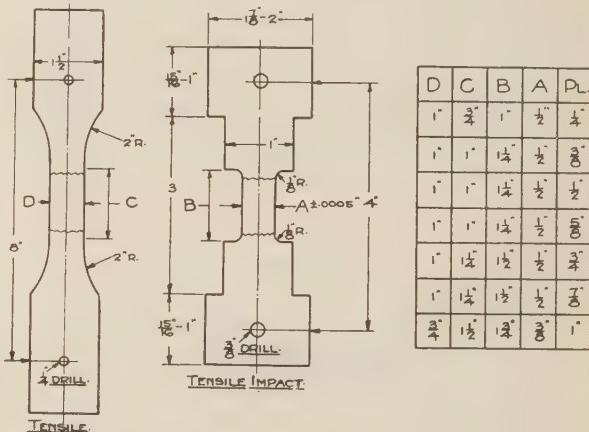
DIMENSIONS OF TENSILE-TEST SPECIMEN FOR BUTT WELDS AS USED AT THE WATERTOWN ARSENAL
